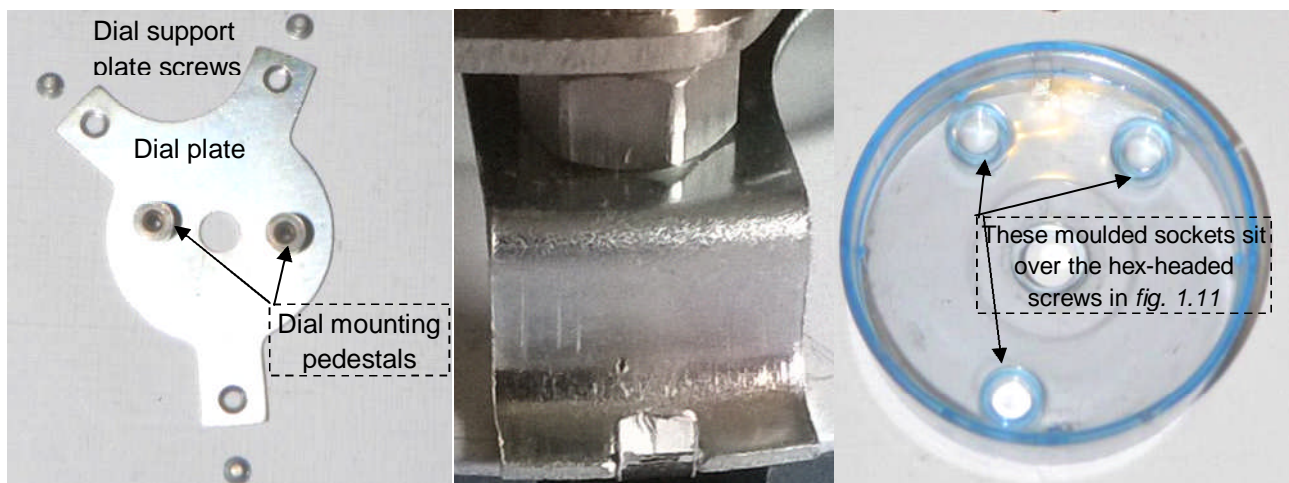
Several methods of fitting the dial plates are used within these clocks. Some clocks (early on left) have a flat dial support plate secured to the front of the clock with raised, threaded pedestals for the dial mounting screws. Other clocks (later centre) have a similar dial support plate with formed legs supporting the dial plate which is secured with crimped lugs. In later clocks (right) the dial attaches to the plastic carrier by the mounting lugs which enter into slots in the plastic carrier and are bent over to fix the dial in place.
